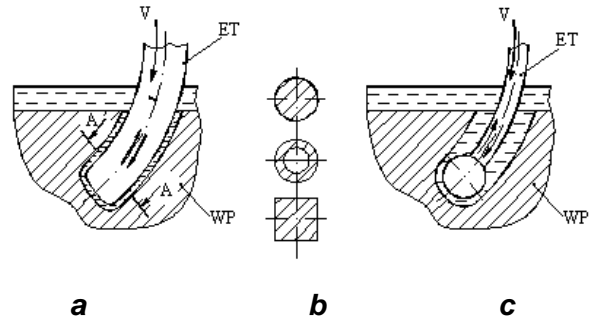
Shape of the electrode tool active part; a – ring shape; b – cross sections through the electrode tool; c – spherical shape
